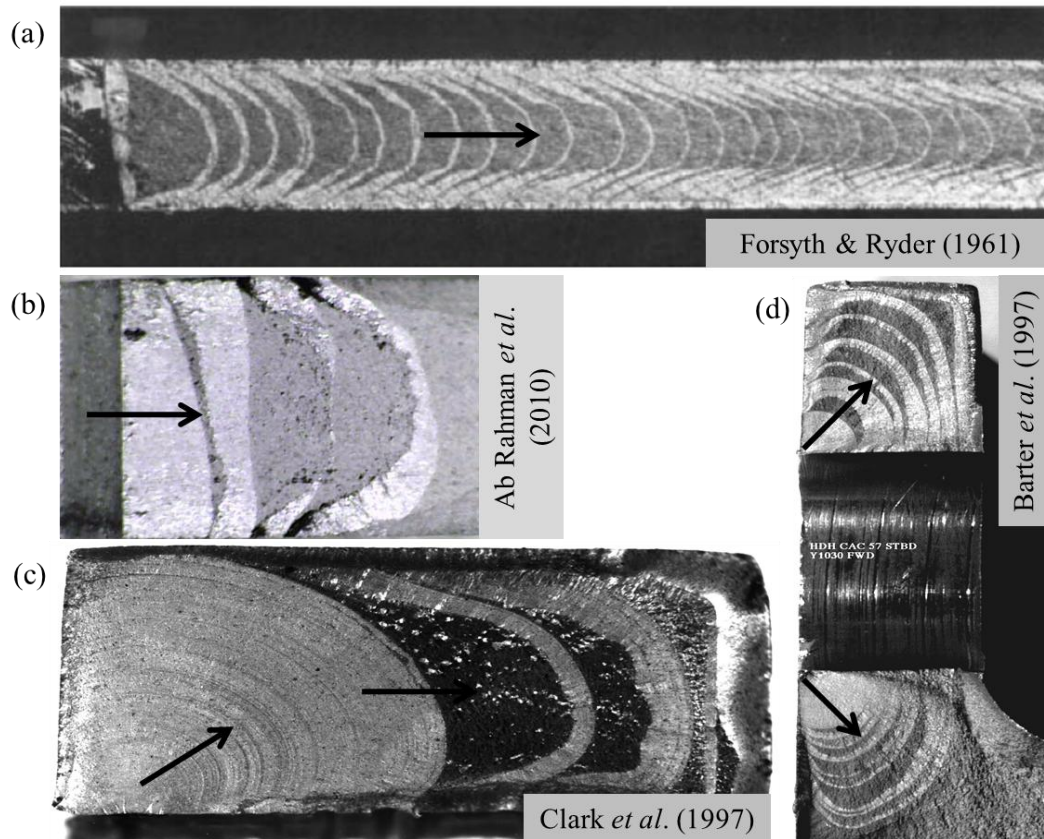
Examples of stable tearing bands on fatigue fracture surfaces: (a), (b) laboratory coupons of aluminium alloys (Forsyth and Ryder, 1961; Ab Rahman *et al.*, 2010a), and (c), (d) fracture surfaces from wing spars in RAAF aircraft (Clark *et al.*, 1997; Barter *et al.*, 1997). Arrows indicate the direction of crack growth.
